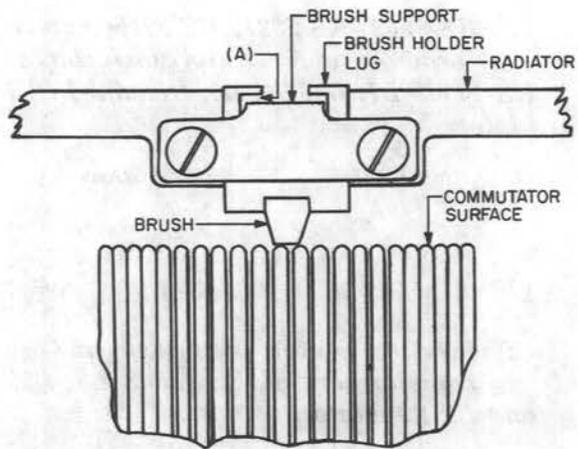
Partial View of Autotransformer of KS-15908 L2 Regulator Showing Spring-Loaded-Type Brush Assembly
